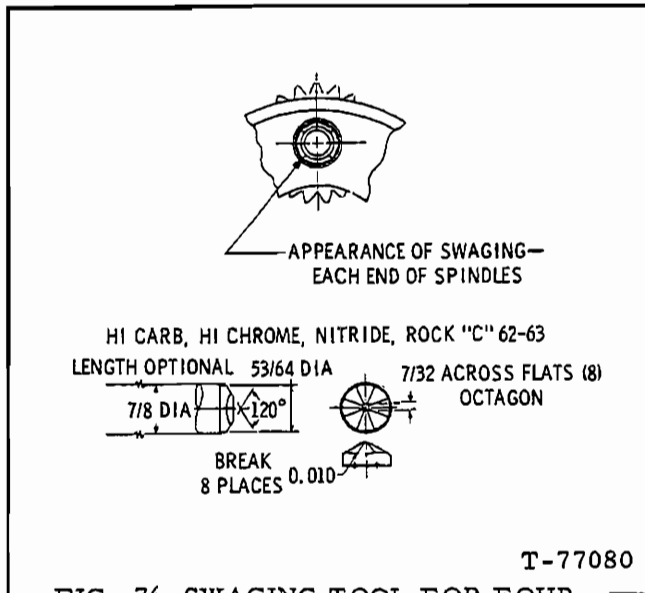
SWAGING TOOL FOR FOUR-PINION LOW-RANGE AND REVERSE-RANGE PINION SPINDLES
